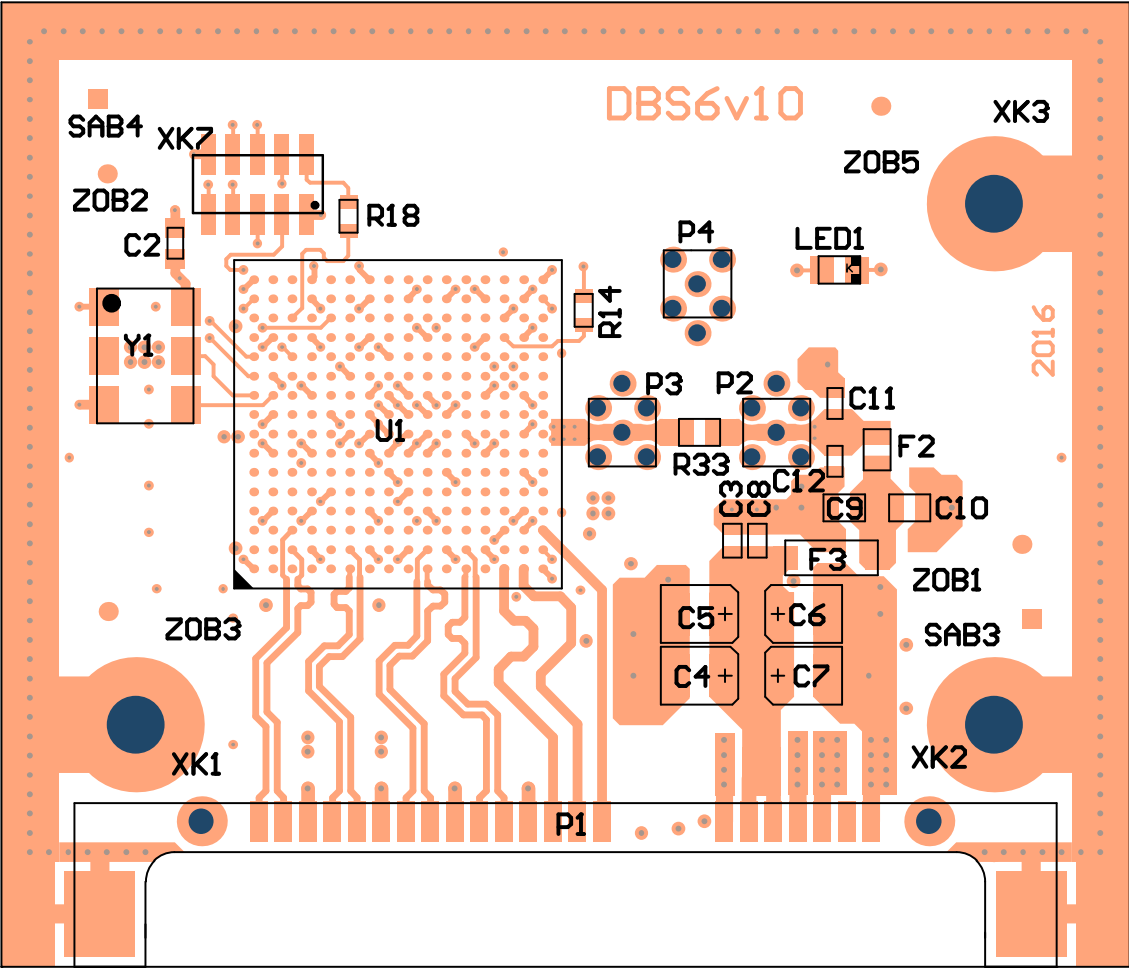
36 Daughter board S6 composite drawing - Top layer
